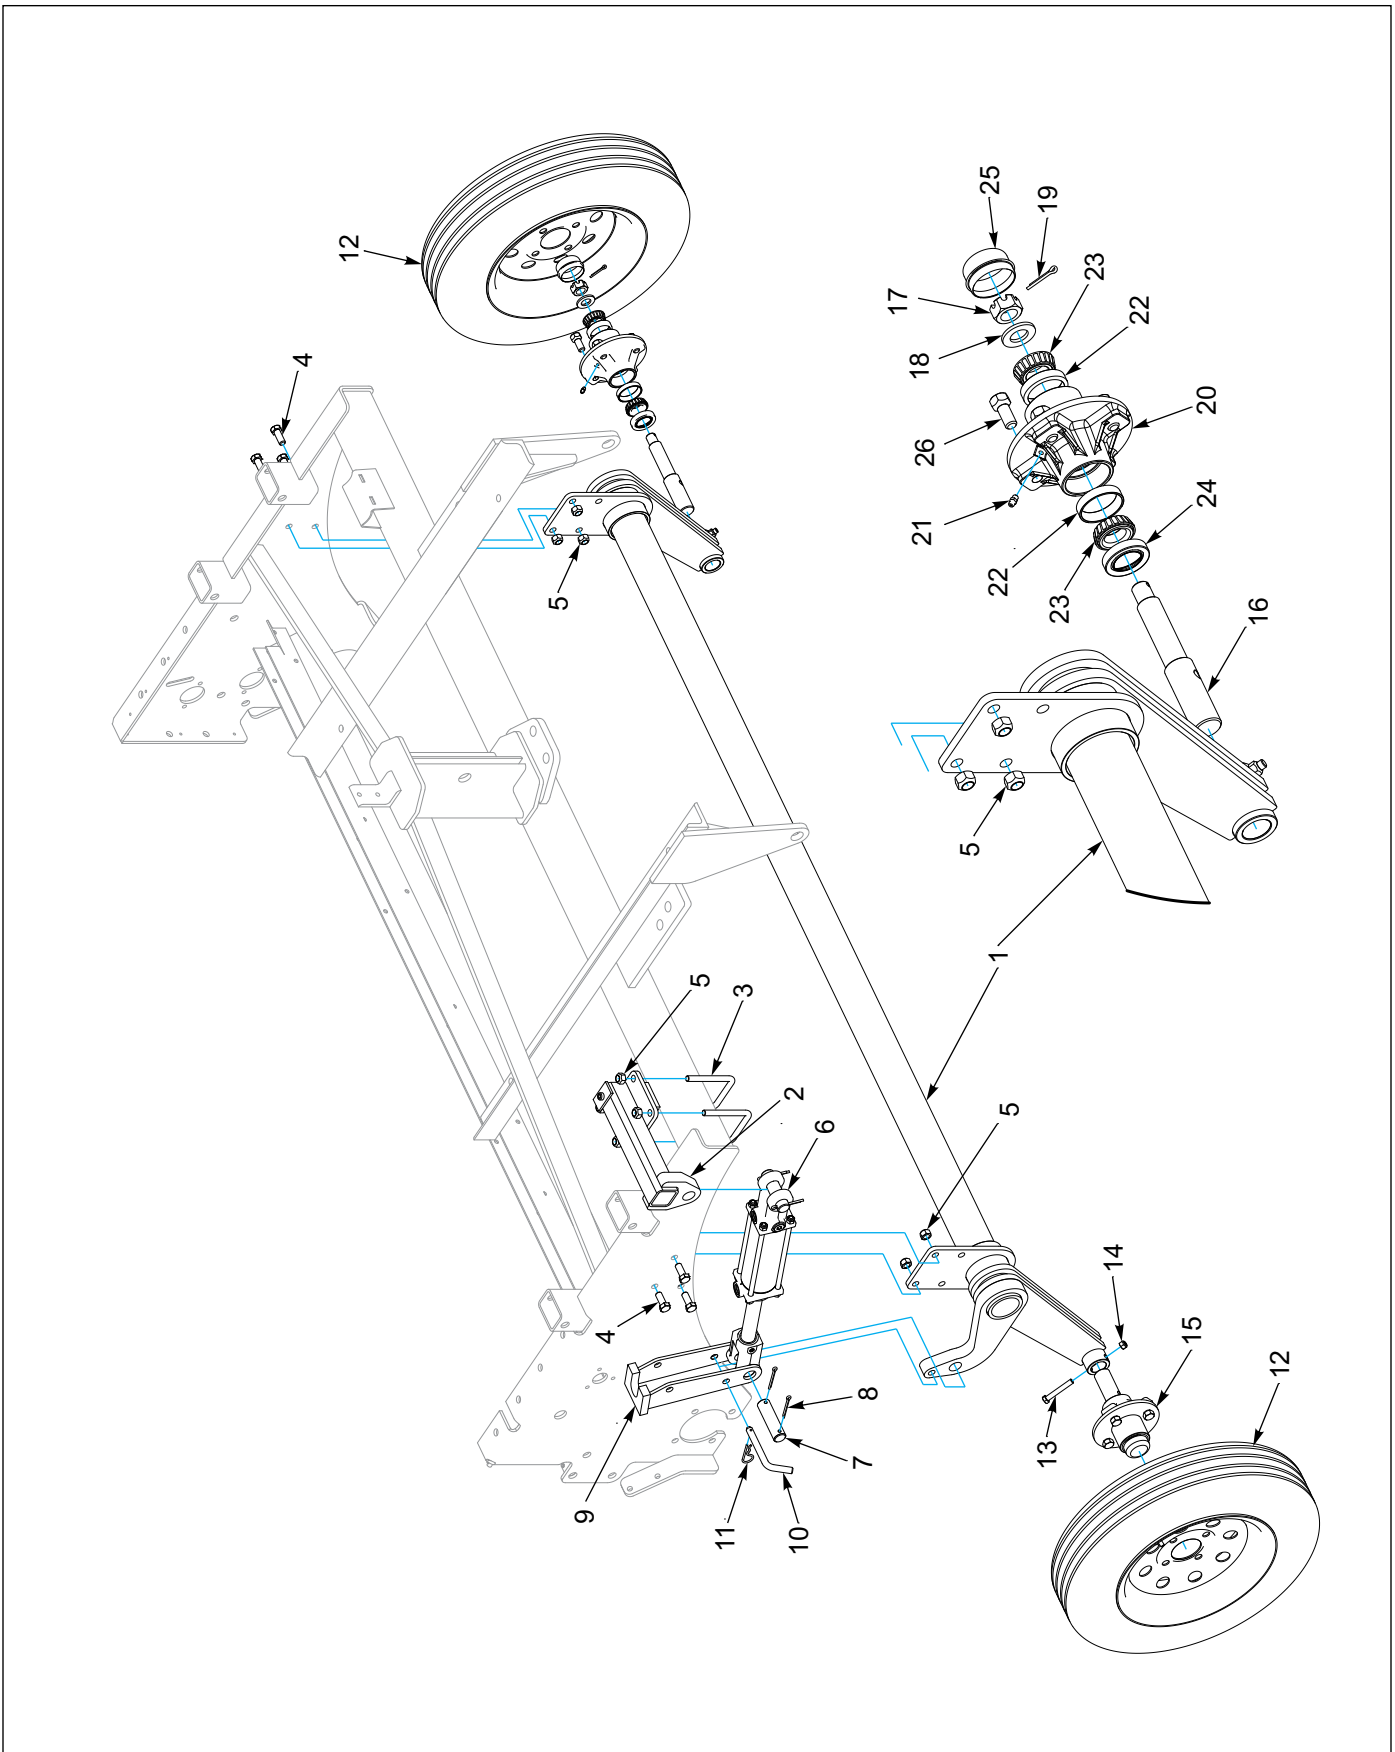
RockShaft Assembly with Hydraulic Cylinder
